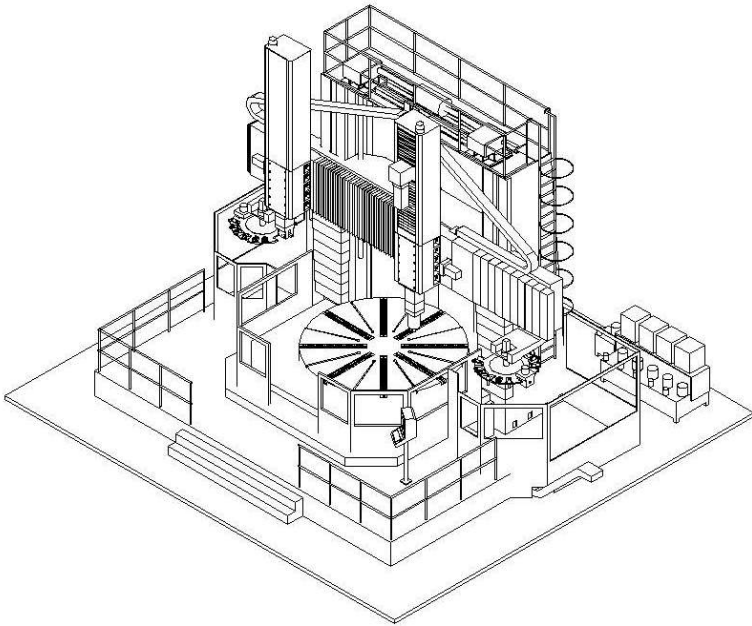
View of the TOSHULIN vertical lathe-type machining centre
